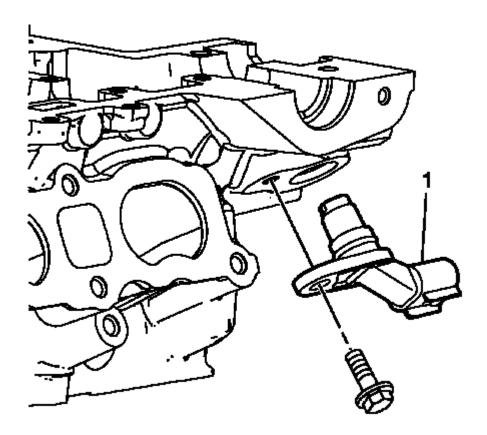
Intake Camshaft Position Sensor Courtesy of GENERAL MOTORS COMPANY
